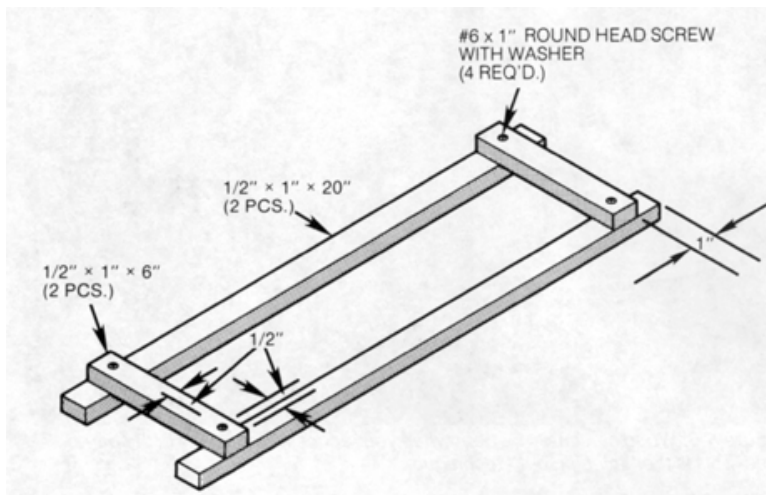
Construction details of a parallel rule that will be used to determine the position of the guide strip.
